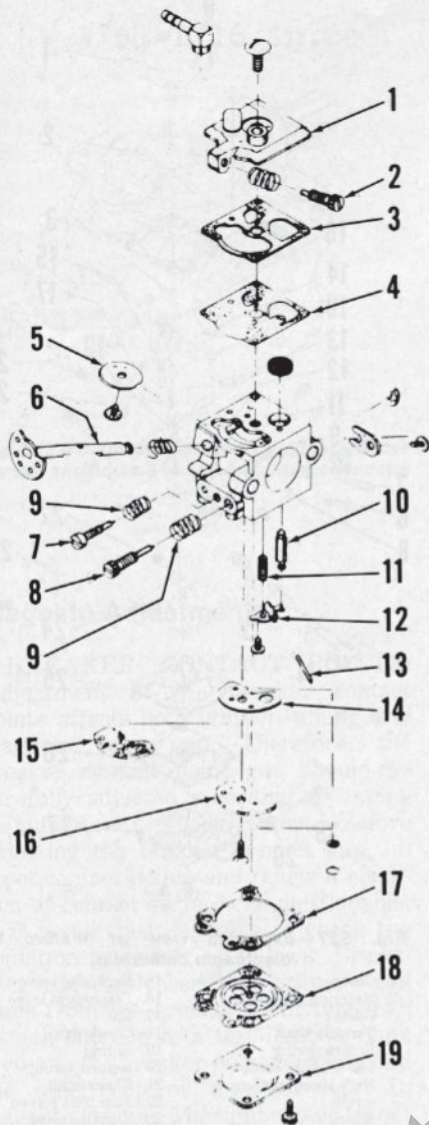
Exploded view of Walbro WA diaphragm carburetor.
